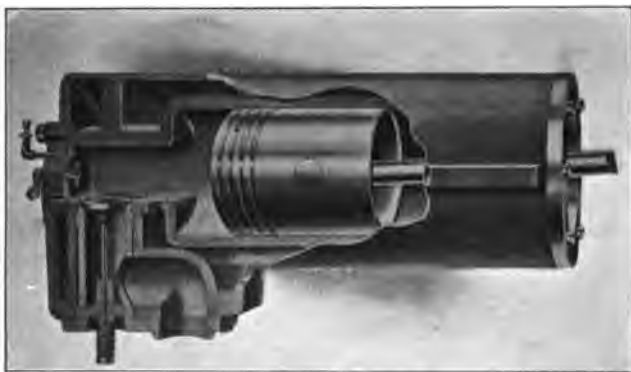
Cylinder Construction, Fairbanks Engine.
